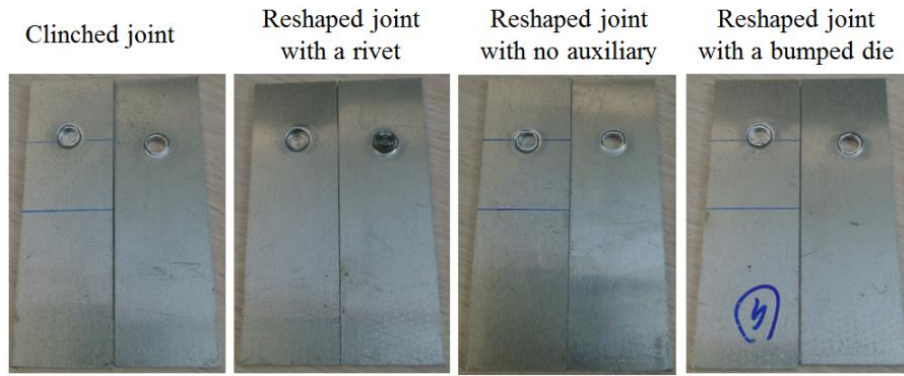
Neck fracture mode in the tension-shearing tests
